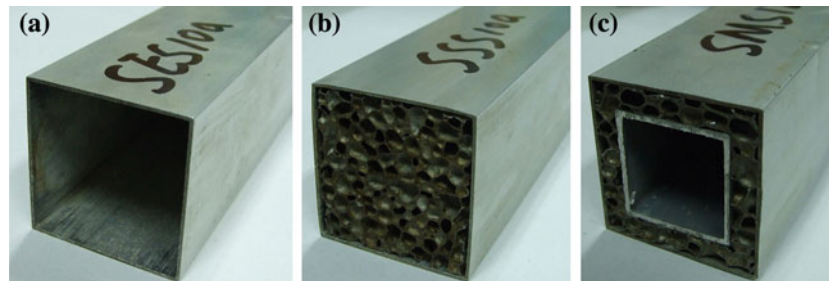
a Empty tube, b foam-filled single tube and c foam-filled double tube
